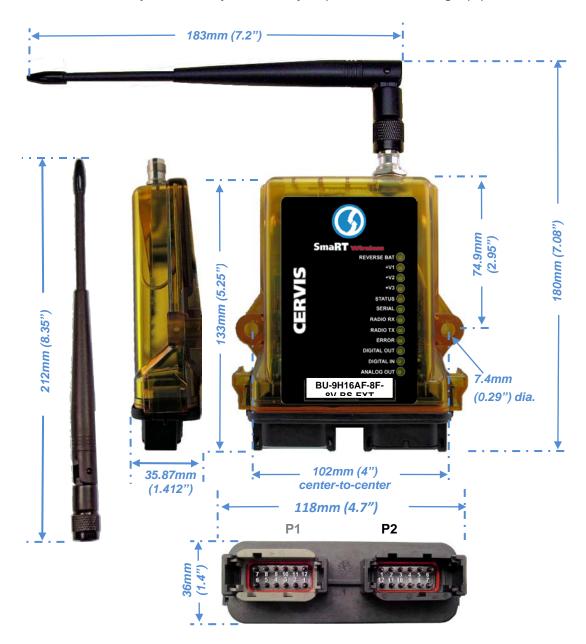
SmaRT BU-9H16AF-8F-8V-RS-EXT Mounting Dimensions
